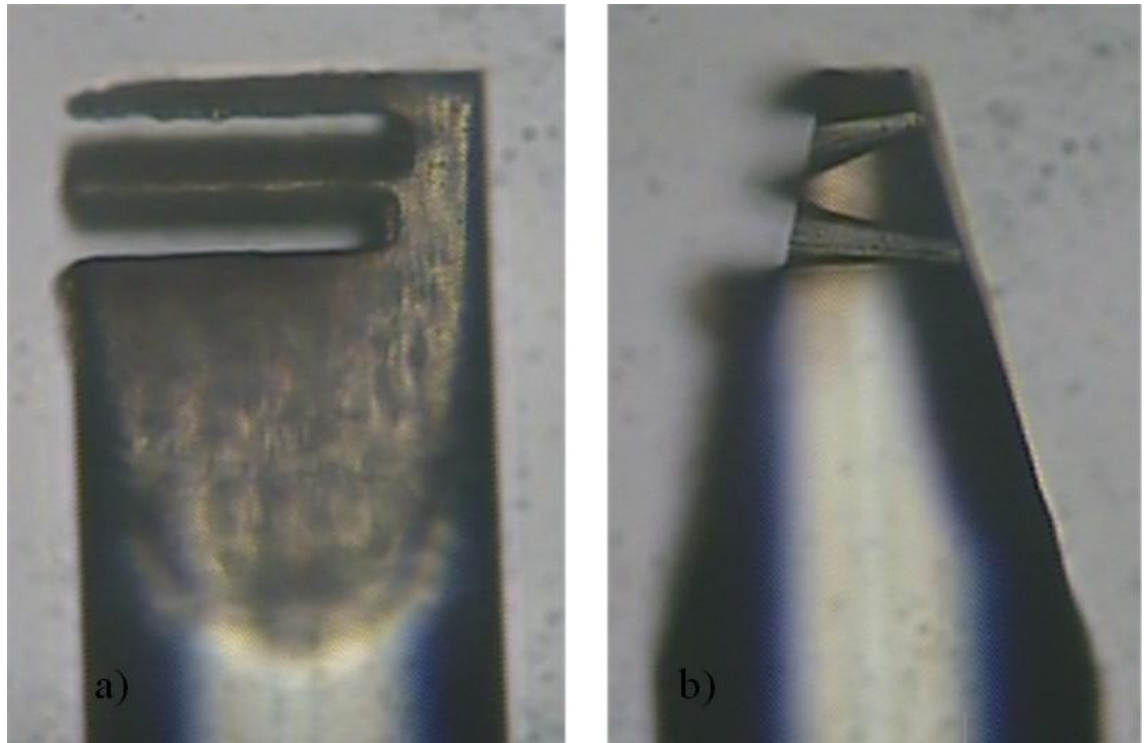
A cantilever machined with a single cut, tapering angle indicated by lines, view along the cantilever from the side of the fibre.
